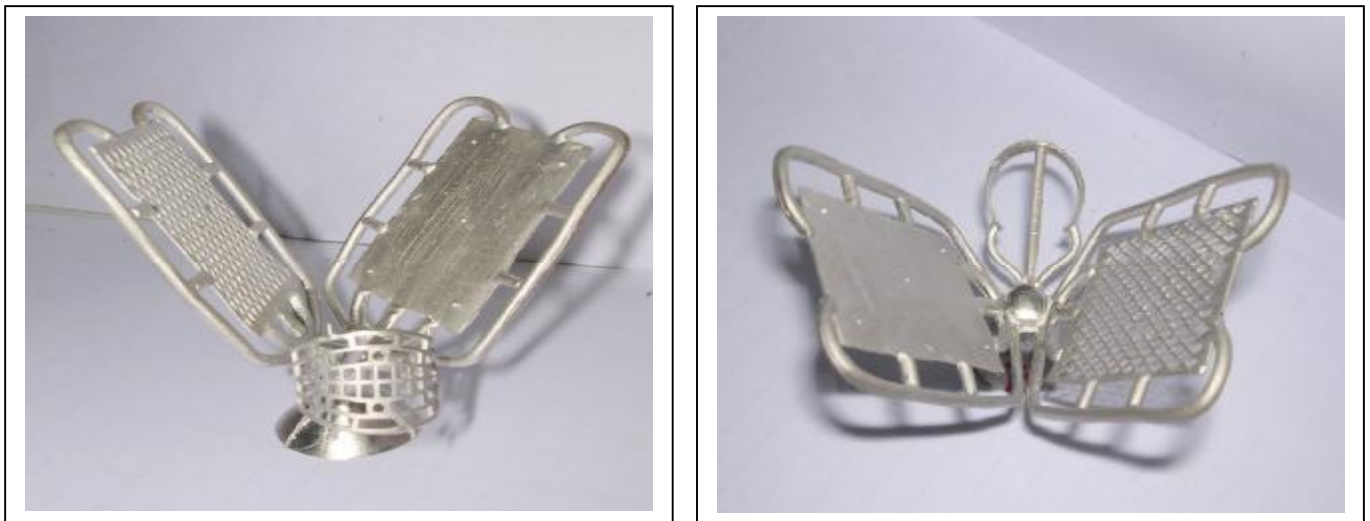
SUCCESSFUL CASTING OF TEST TREE
